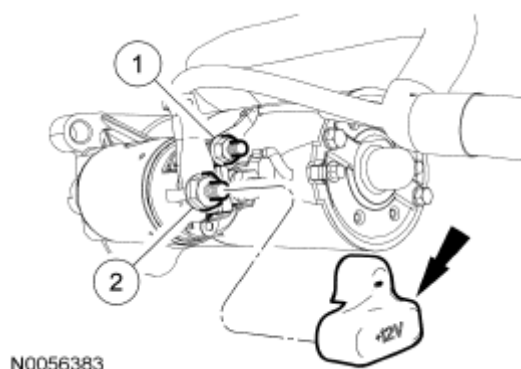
Locating Starter Wiring Nuts And Terminal Cover
